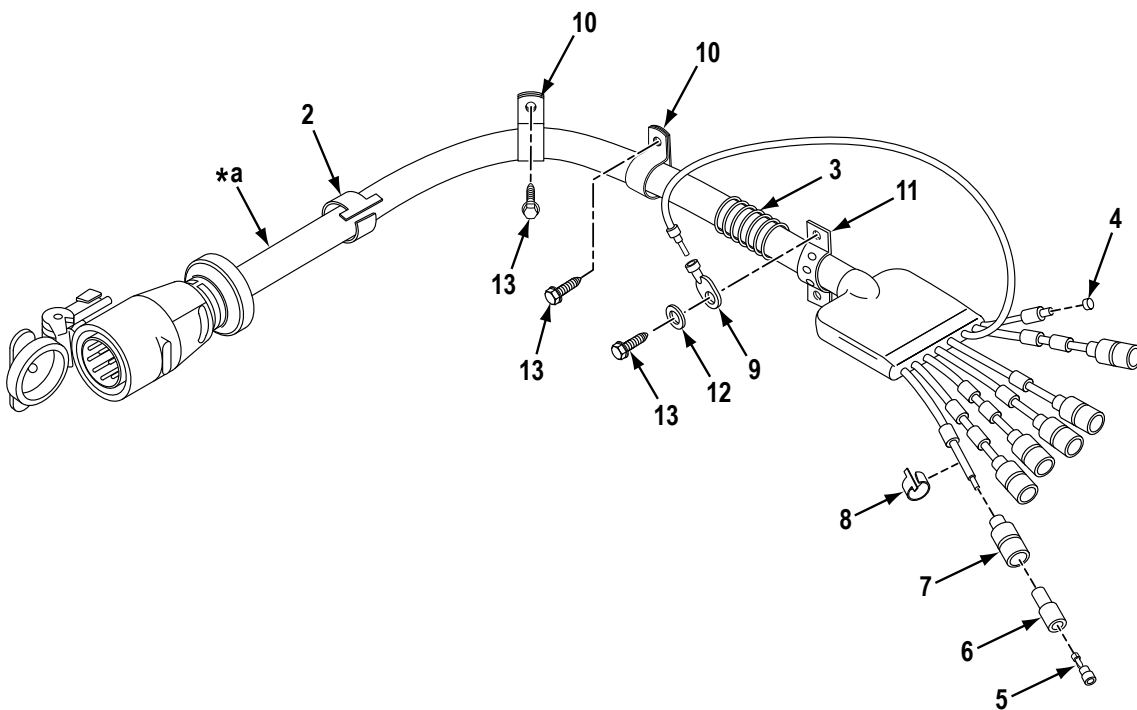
Chassis Wiring Harness (Sheet 2 of 2).
